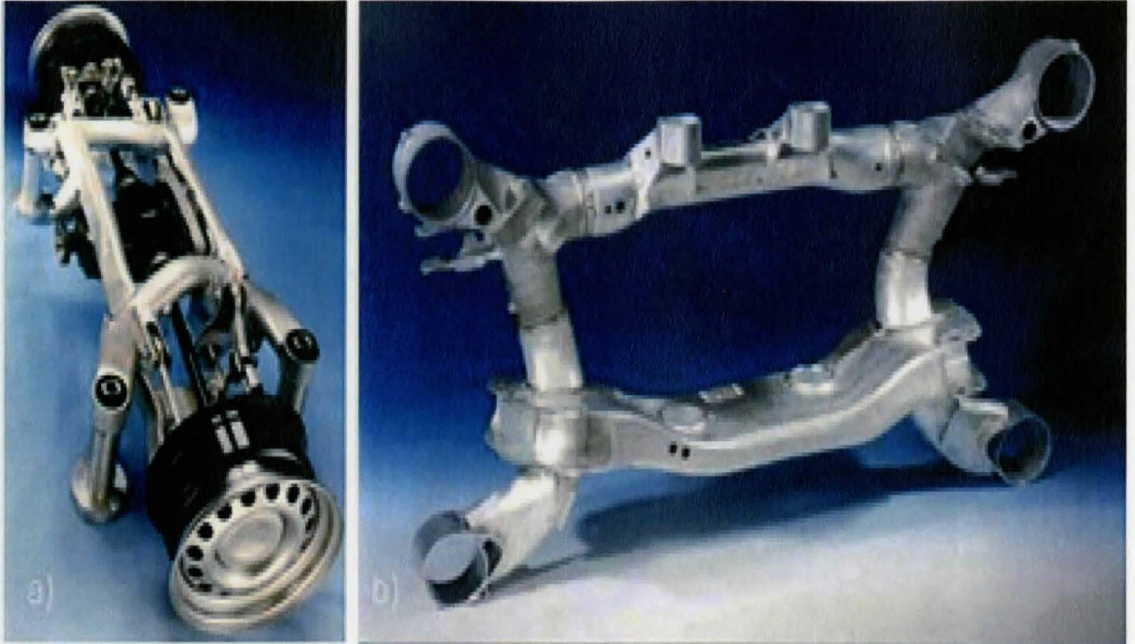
Rear axel subframes, wheels of Al-Mg sheet (BMW 5 and BMW 7-series) - Combination of welded sheets, hydroformed tubes and caste (www.key-to-metals.com)
